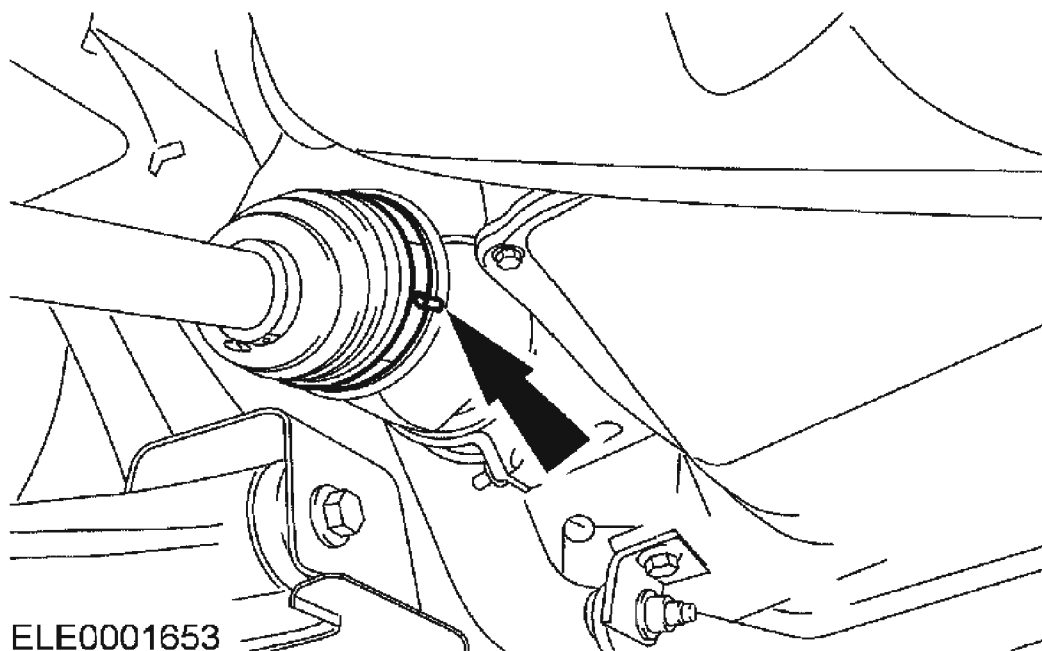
Installing Outer Boot Clamp Using Special Tool
